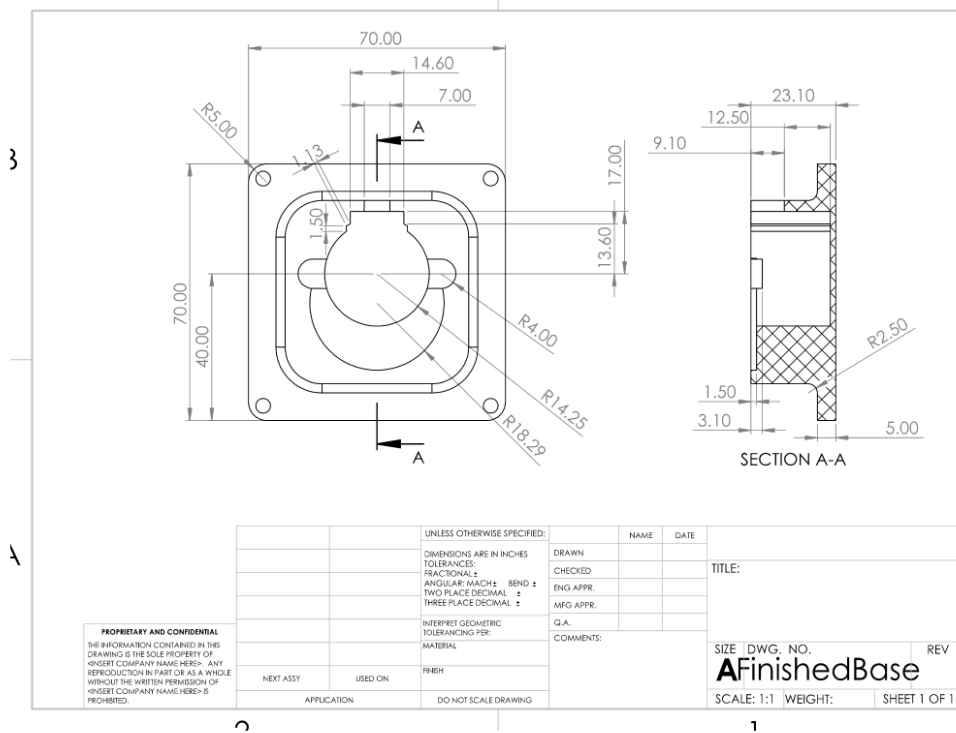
BASE FOR LIDAR HOUSING (DIMENSIONS IN INCHES)
